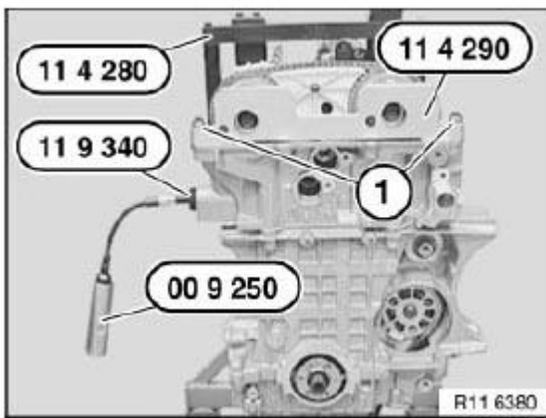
Identifying Bolts With Special Tools (11 4 280, 11 4 290, 11 9 340 And 00 9 250)
